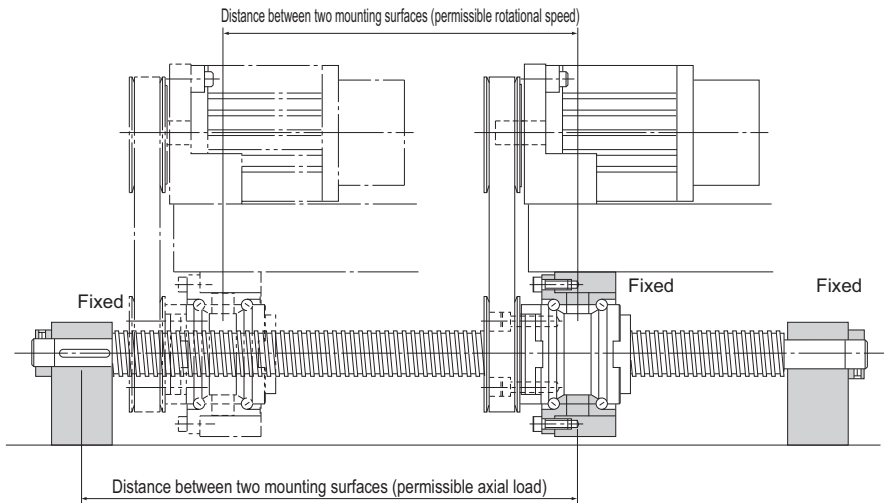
Screw Shaft Mounting Method for Rotary Nut Ball Screw: Fixed - Fixed
